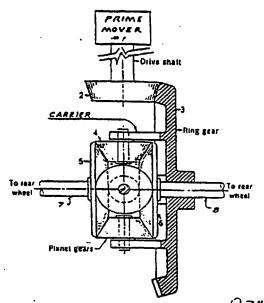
TYPICAL BEYEL-GEAR DIFFERENTIAL
